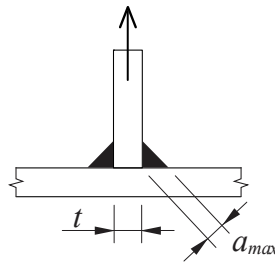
Maximal throat thickness of fillet weld in T-joint
